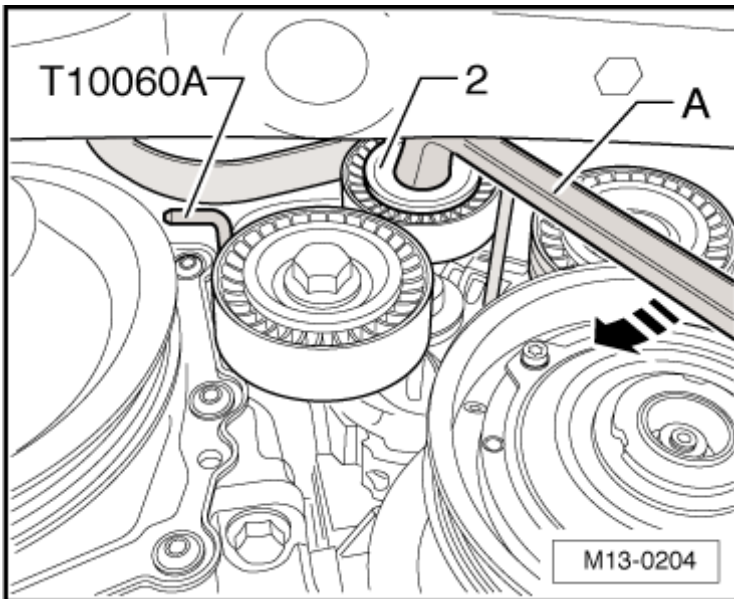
Identifying Locking Pin Inserted T10060A Into Tensioning Element
